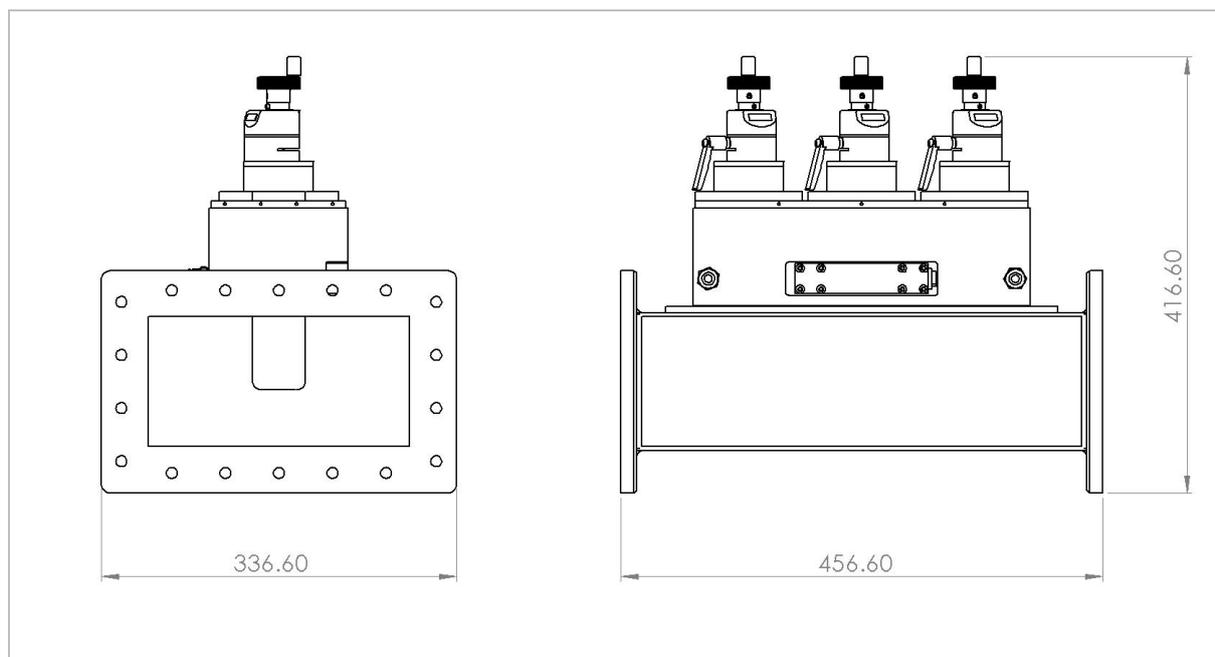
Basic STMT 2.1 dimensions in millimeters.
